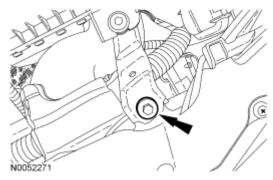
Locating Brake Booster Vacuum Hose Courtesy of FORD MOTOR CO.
